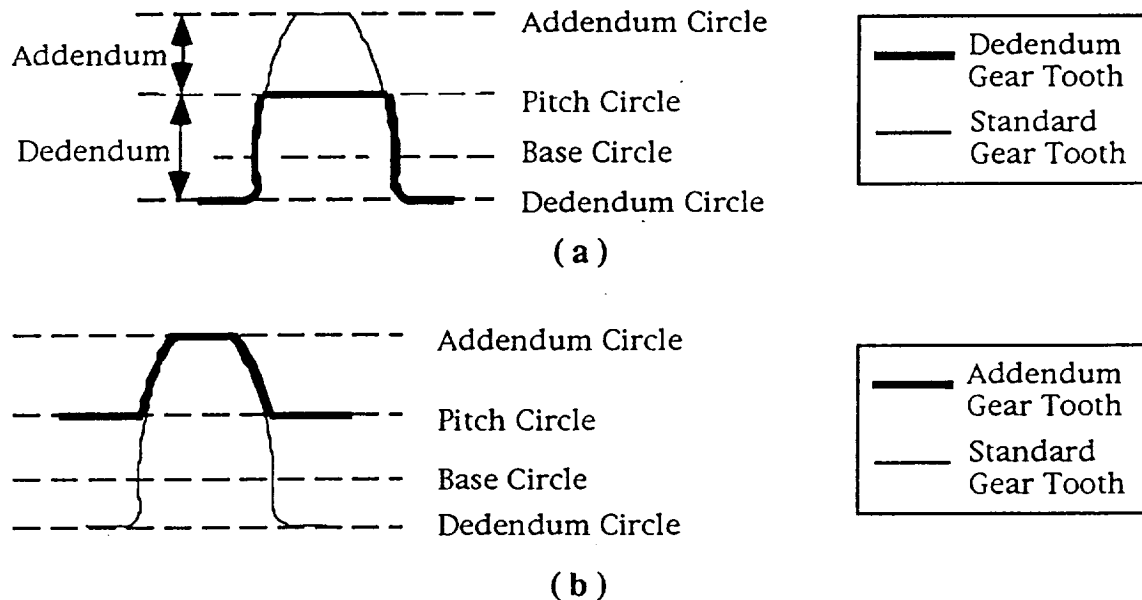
(a) Dedendum Gear Tooth (b) Addendum Gear Tooth
